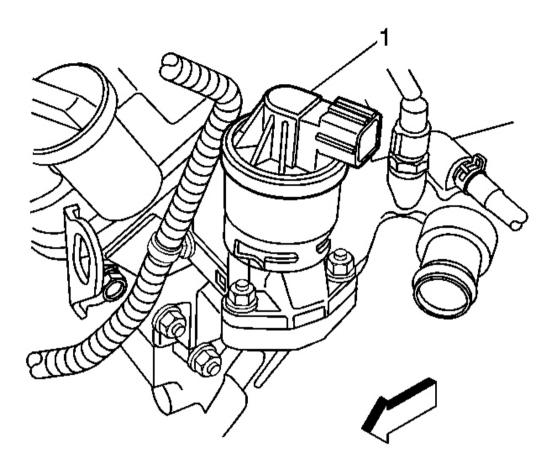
View Of Exhaust Gas Recirculation (EGR) System Courtesy of GENERAL MOTORS CORP.
